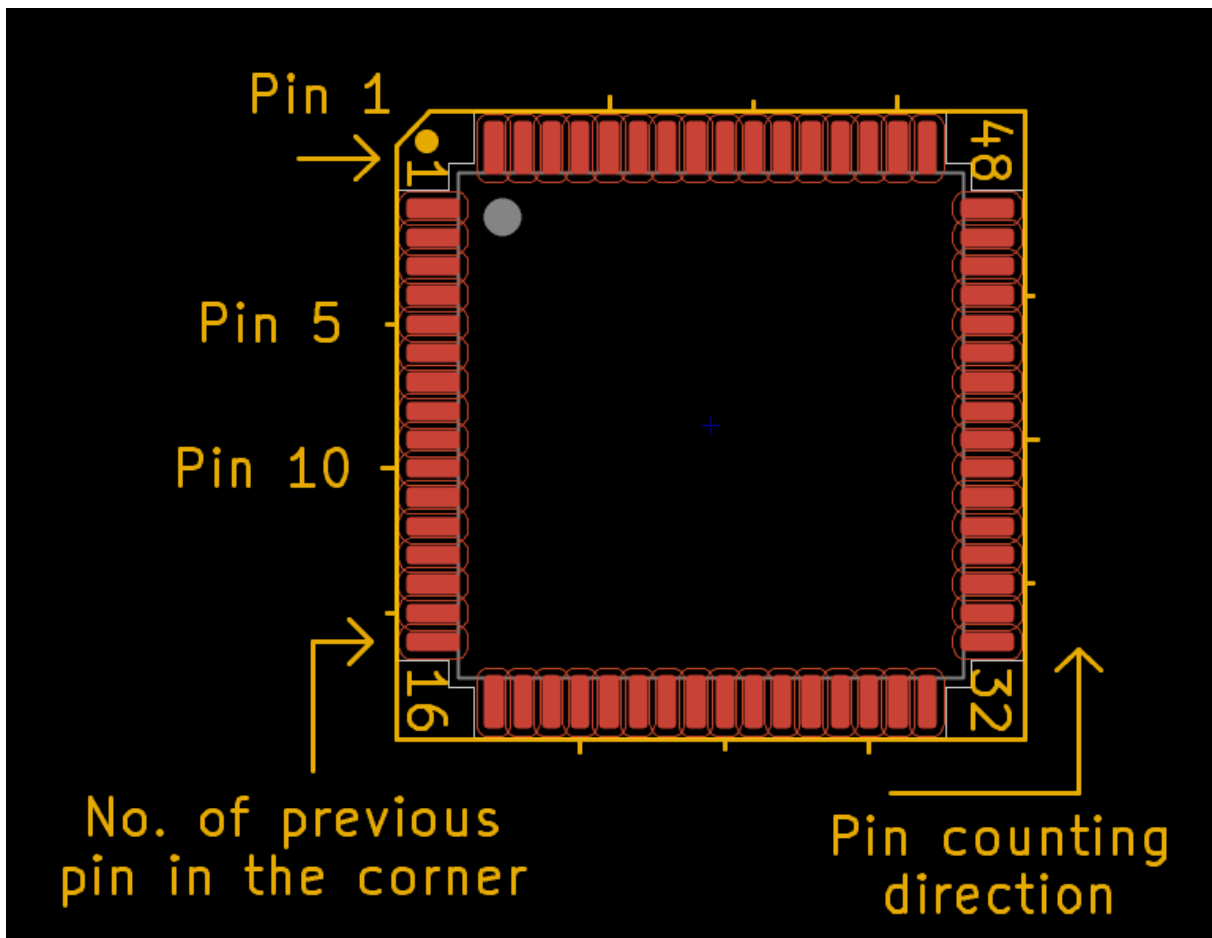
QFP package footprint showcasing the pin number indicators.
